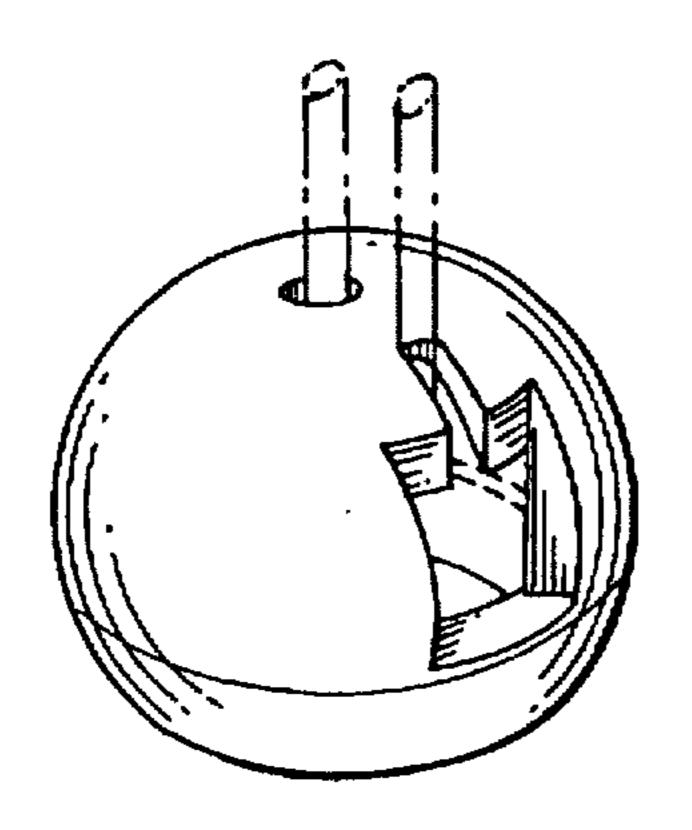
is a front side elevational view of the cord pull of FIG. 8;
